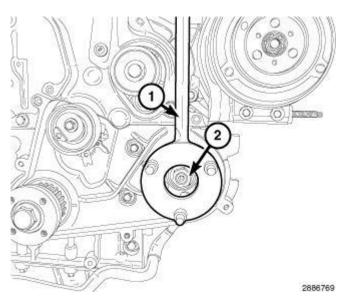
Locking Tool & Injection Pump Sprocket Mounting Nut Courtesy of CHRYSLER LLC
